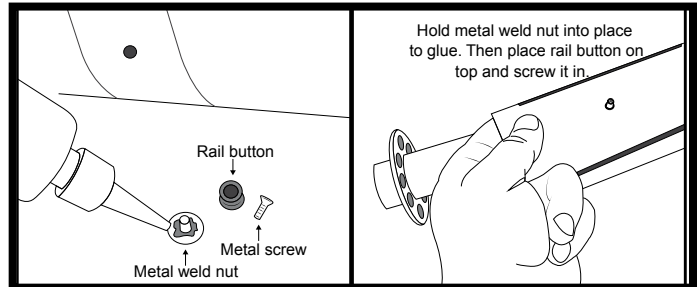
Putting the aft rail button at the end of the tube makes it easiest to load the rocket onto the rail because you can see the button without obstruction. But the weld nut often interferes with the aft centering ring.
